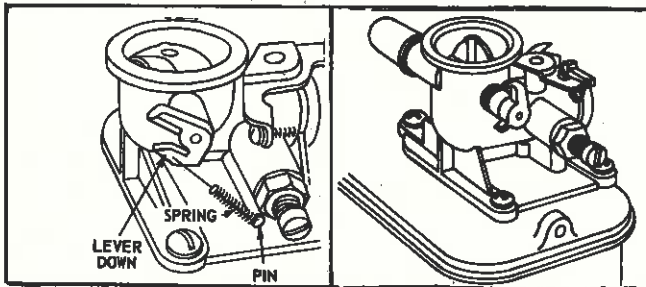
Choke Shaft and Valve — Choke-A-Matic
